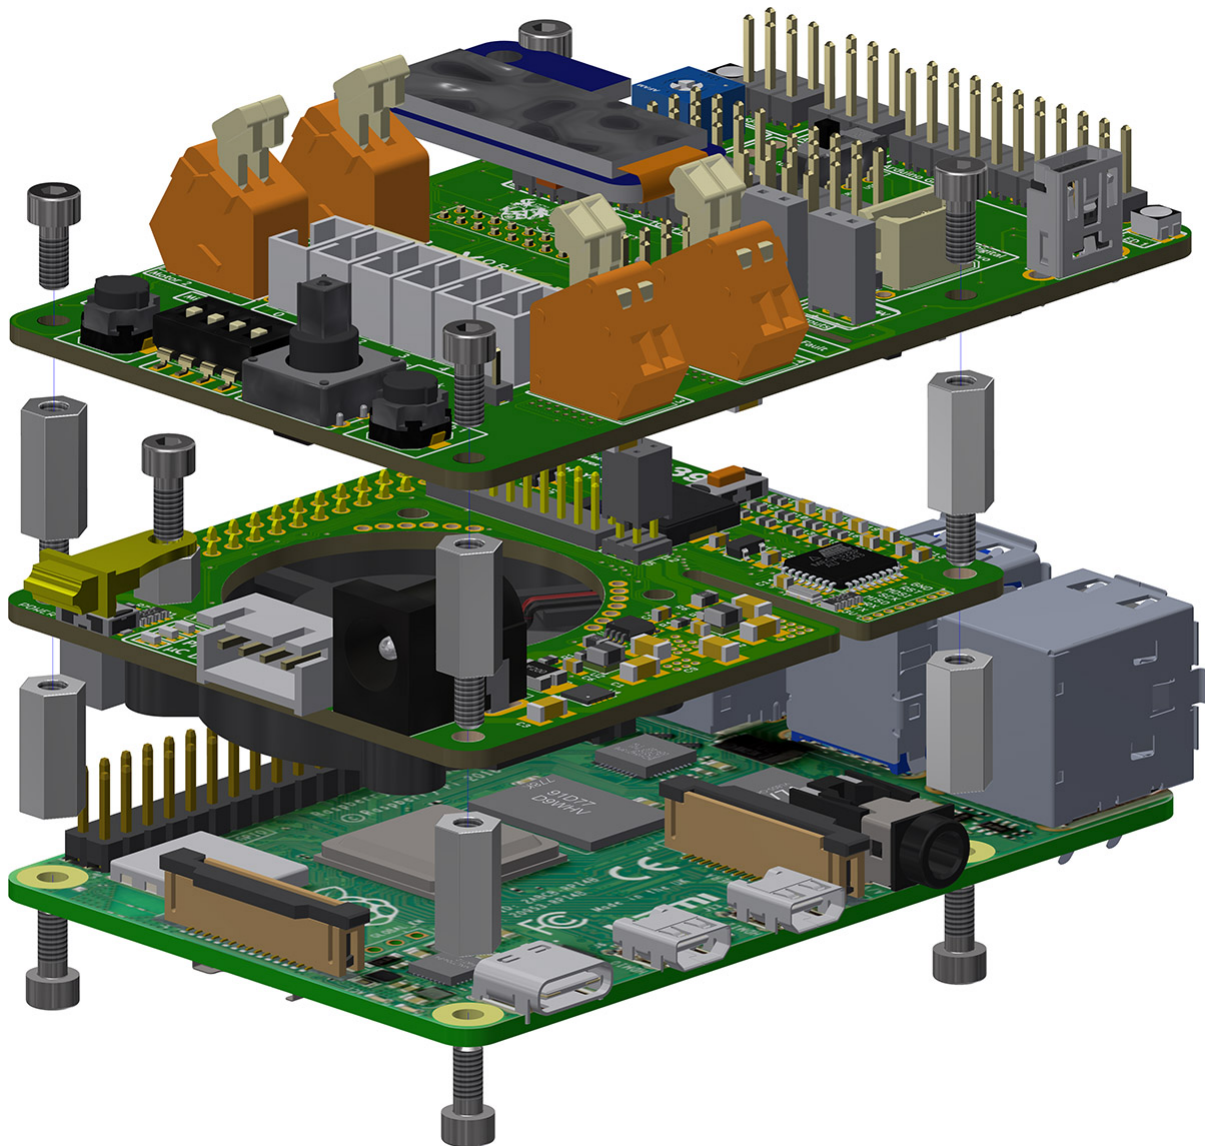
Exploded view of YRK showing 11mm standoffs and M2.5 screws
